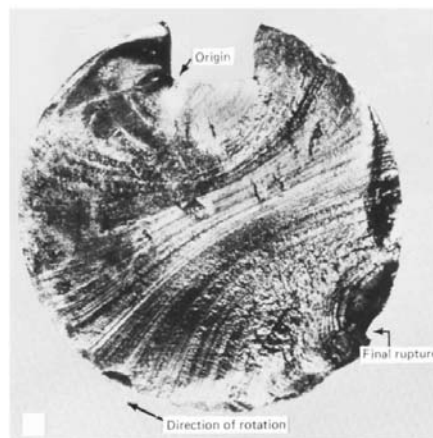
Fracture surface of a rotating steel shaft that experienced fatigue failure. Beachmark ridges are visible in the photograph. (Reproduced with permission from D. J. Wulpi, *Understanding How Components Fail*, American Society for Metals, Materials Park, OH, 1985.)
